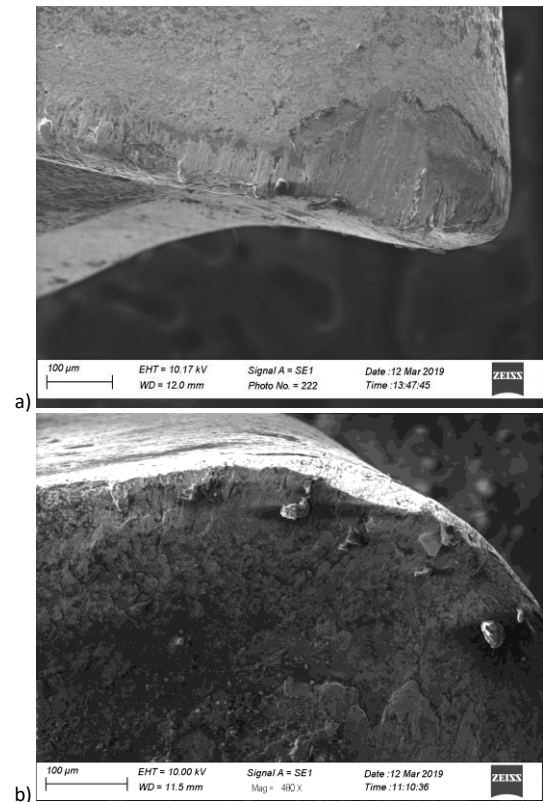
The microscopic view of flank (a) and rake face (b) wear for CCMT 09T304-UM 2025 cutting insert
